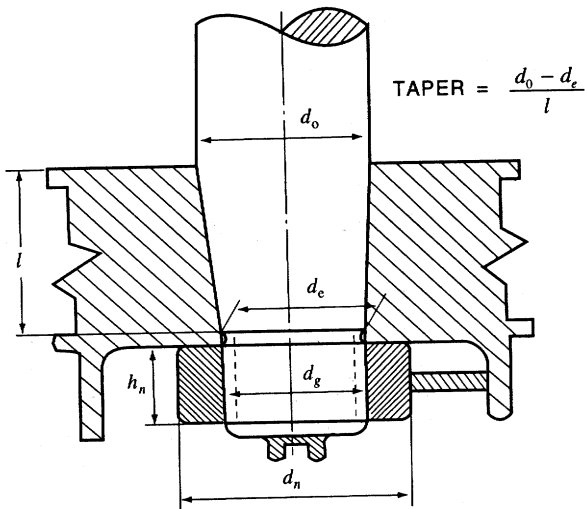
Cone Coupling without Hydraulic Arrangement
